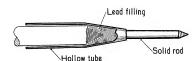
Loos spindle for mounting on existing screwed taper end. The tapered portion of the hollow tube is filled with lead to form a plug which the screwed point of the mais spindle can penderate. The solid rod forming the end of the loos spindle is tapered and exerced to accommodate small polishing wheels.
